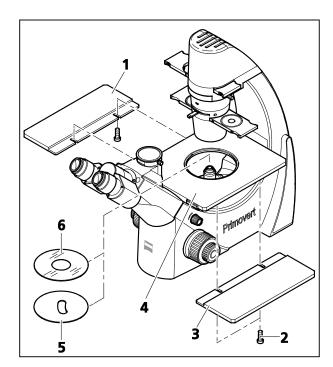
Inserting the stage inserts and attaching the stage enlargement plates
